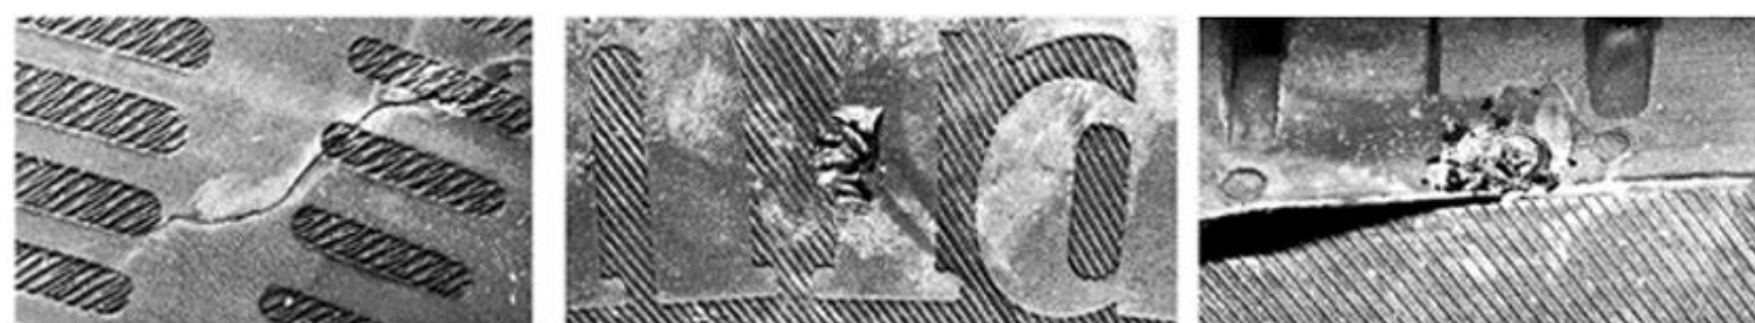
Examples of defects (first - crack, middle, last - mechanical integrity damage)
